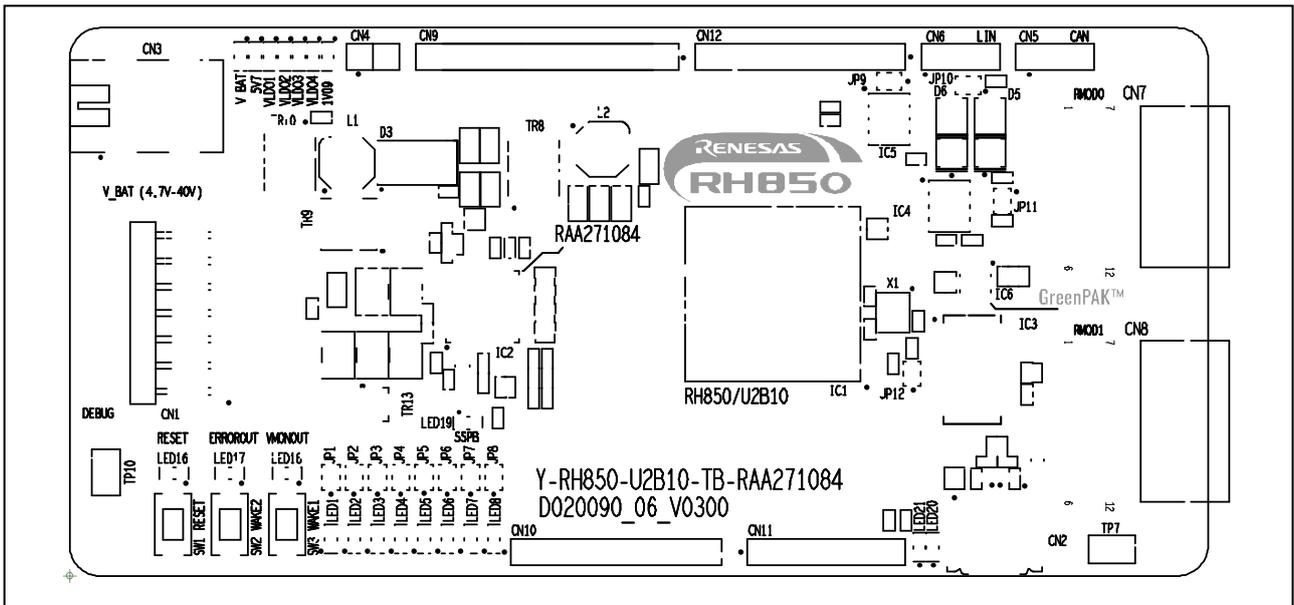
Placement of components on the top side of the target board for board version D020090_06_V03
